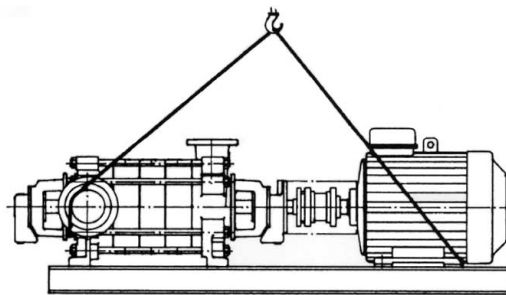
Example of the proper lifting method for baseplate-mounted units with a driver
